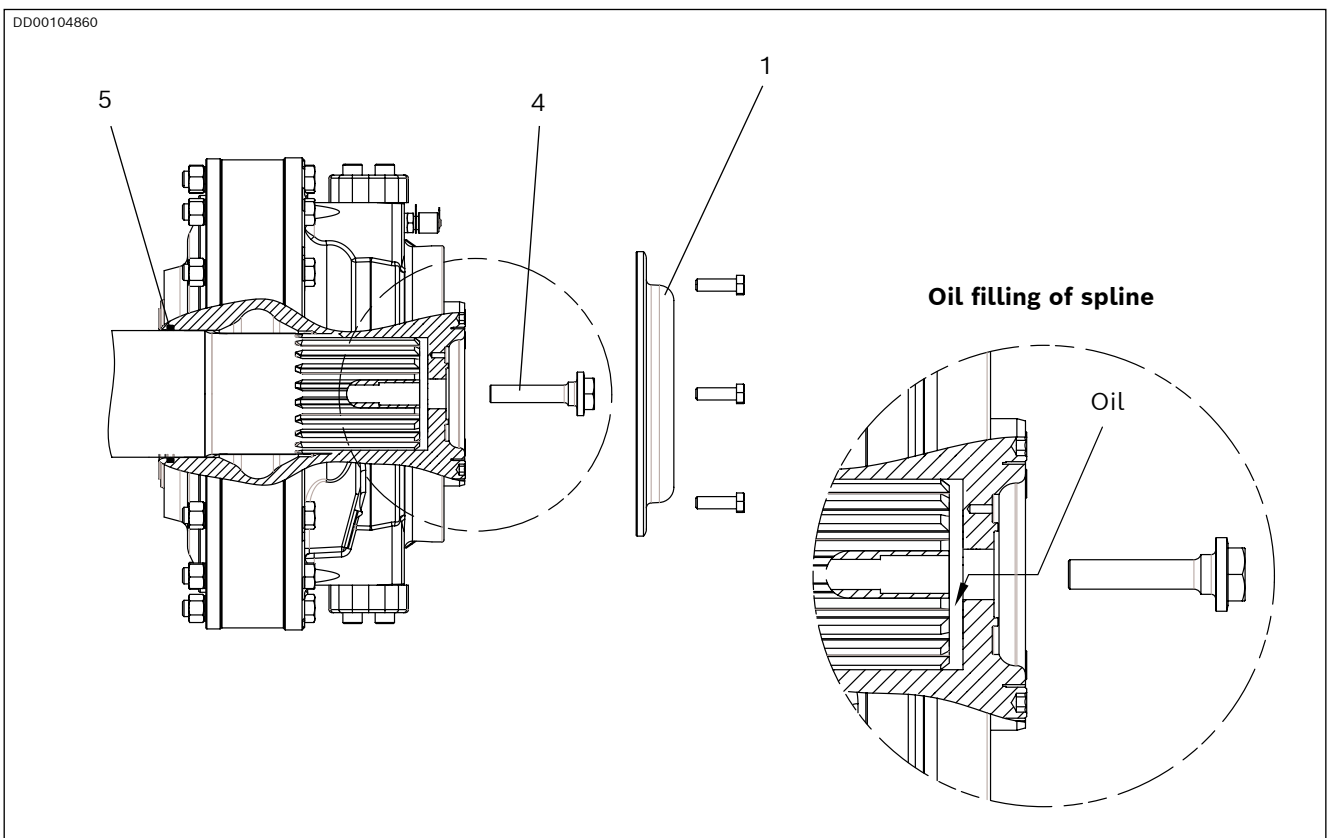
Fix the spline motor with the mounting kit, horizontal mounting
